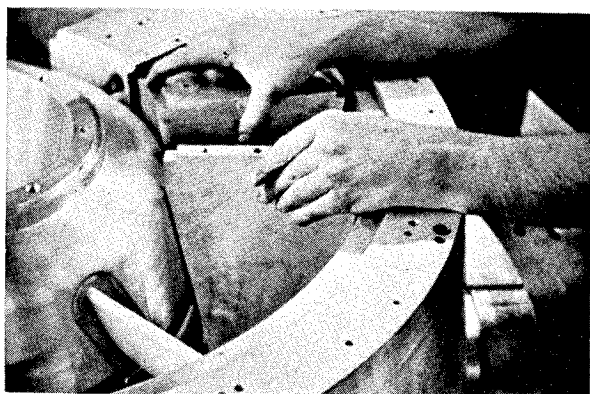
Wax pattern tooling; strut die blocks positioned around soluble wax core.
